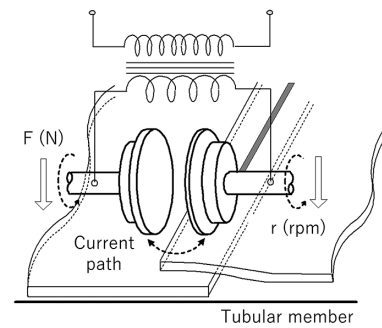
Schematic illustration of indirect seam welding⁴⁾
